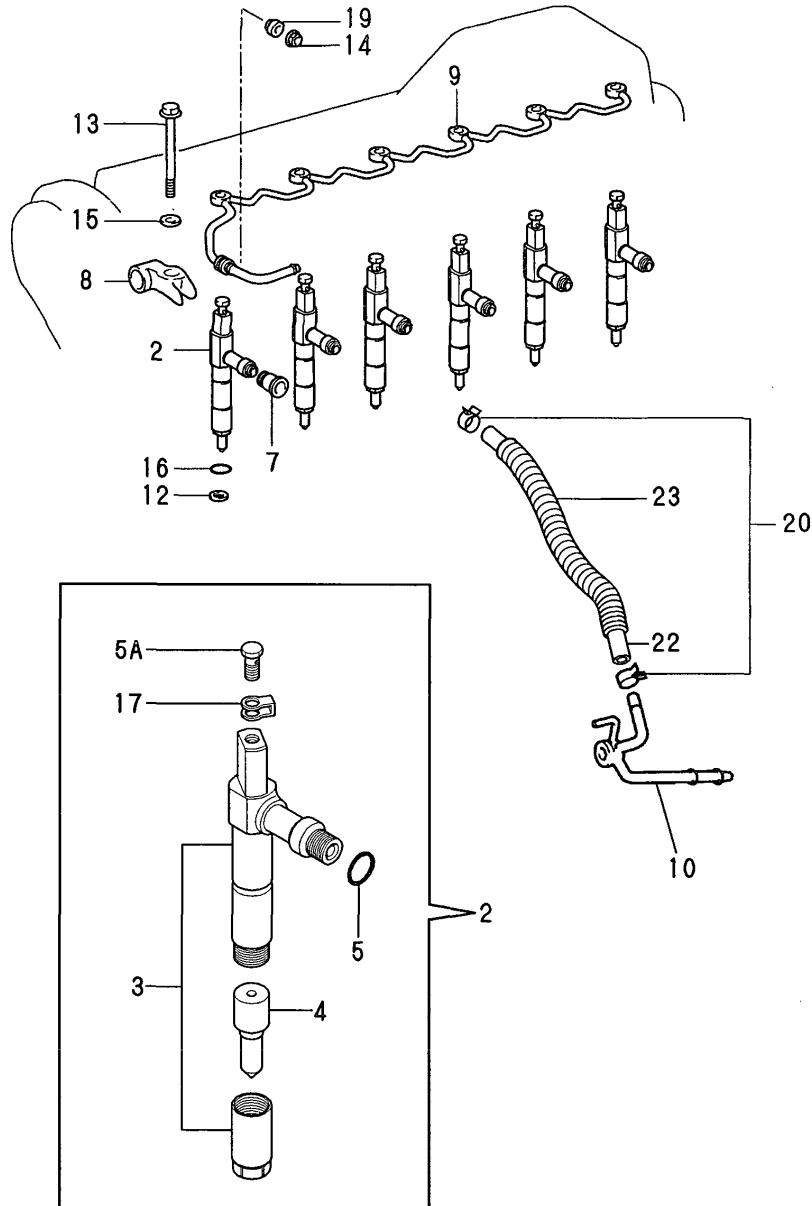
FUEL INJECTION VALVE(6LP-ST/STZY)
